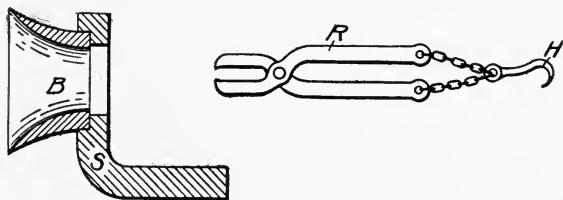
Equipment for Making Butt-Welded Pipe.
